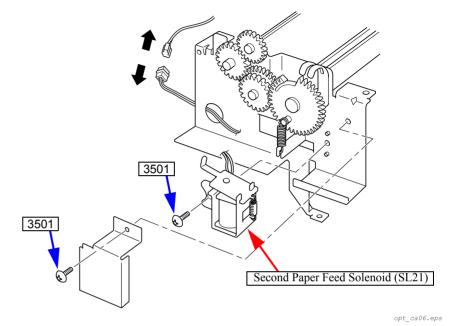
Second Paper Feed Solenoid (SL21) Removal
